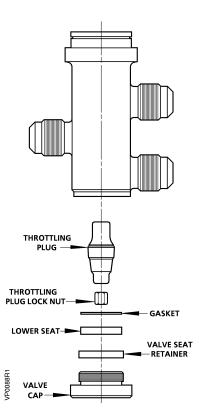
Water Mix Flared-End Throttling Plug Replacement.
